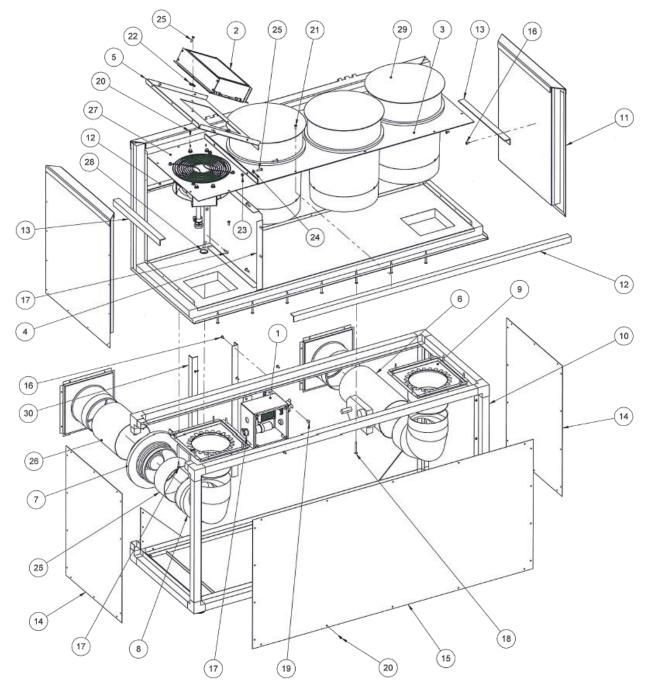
Parts List of the CO₂ Scrubber, Drawing
